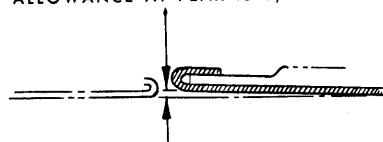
Specified Body Opening Clearance Tolerances - "F" Styles
